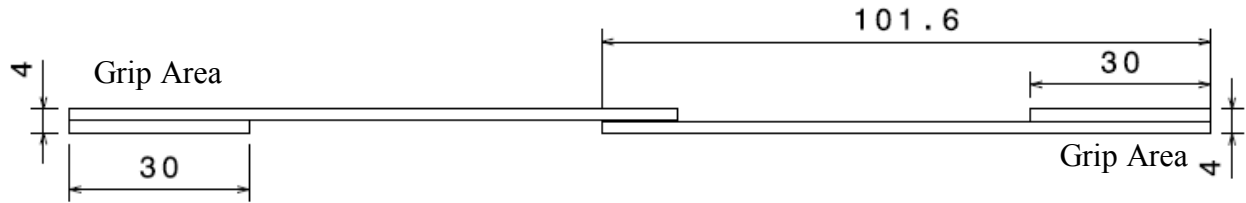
The dimension (in mm) of single-lap-joint sample with small aluminium plate placed on the grip area.
